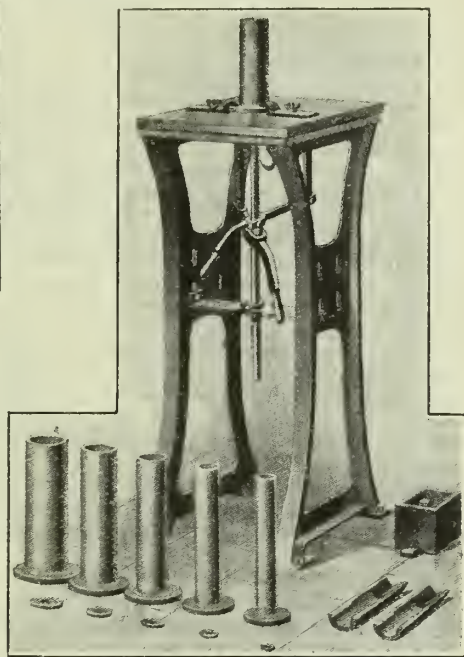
PLUNGER-TYPE CORE MACHINE.
